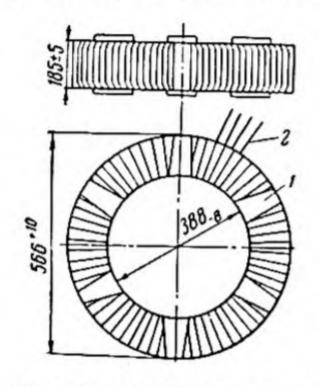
Bushing-type current transformer: 1-wedge; 2-leads
